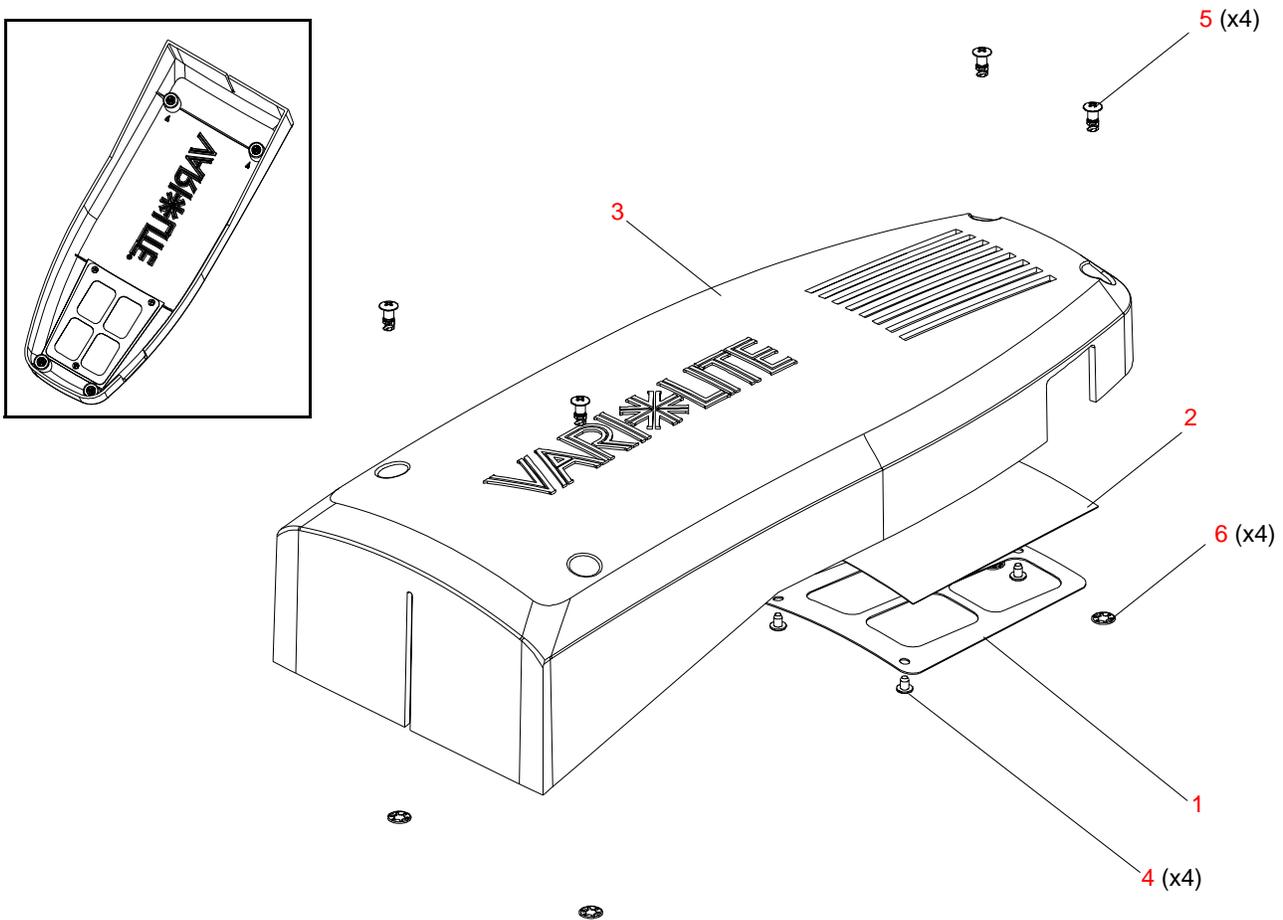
Yoke Arm Cover Assembly (MCB Side)
